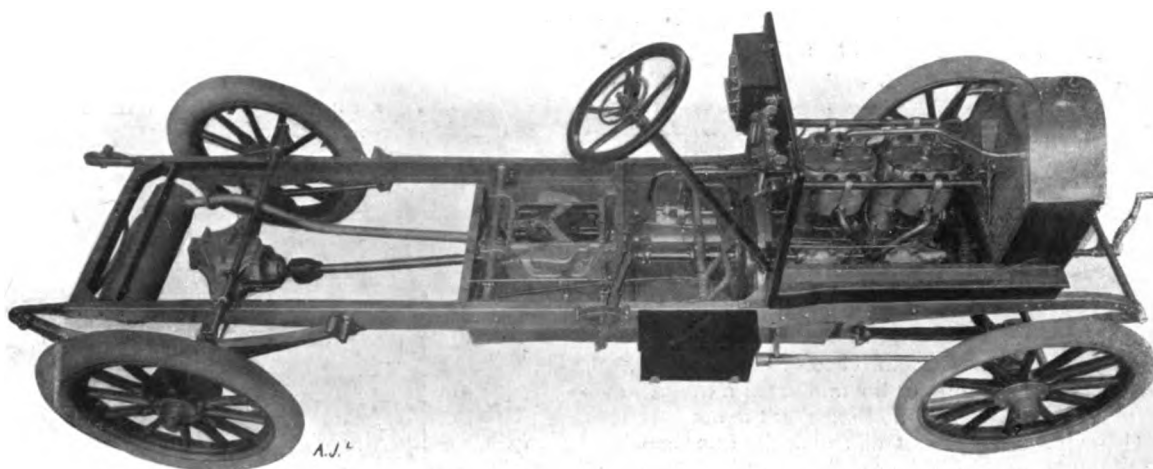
View from above of the 16-h.p. Pivot Chassis, showing the gear-box, with its cover removed.
